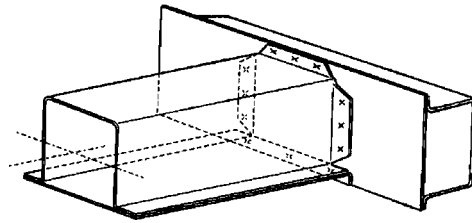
A detailed illustration of type 1 joint in Fig. 3(a) [18]. Beams A and B are also made of sheet metals joined by spot welds.
